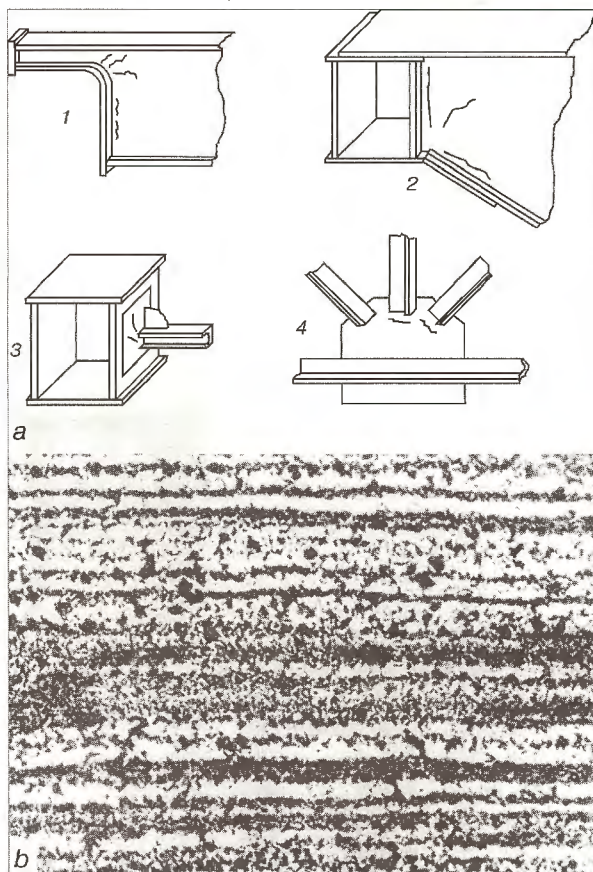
Lamellar fractures of welded components: *a* — kinds of welded components and areas of the most frequent cracks (1 — support assembly of an end beam of a bridge crane; 2 — locations of abutting of the main and end beams; 3 — places of attachment of movement mechanism brackets; 4 — places of attachment of posts and braces); *b* — location of sulphides ($\times 100$) (reduced by 0.60)
